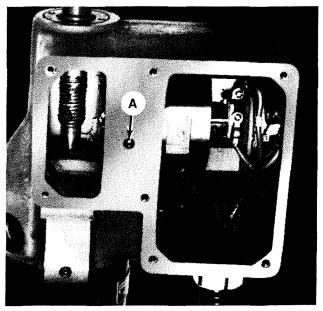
Drive Worm and Worm Wheel Disengaged
